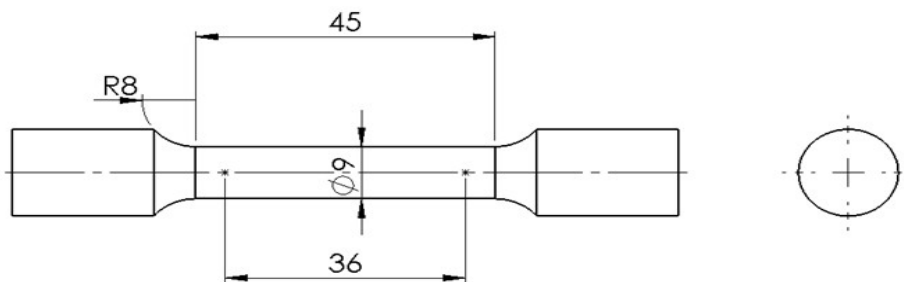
The dimension of the tensile test specimen complies with the ASTM E8M standard
